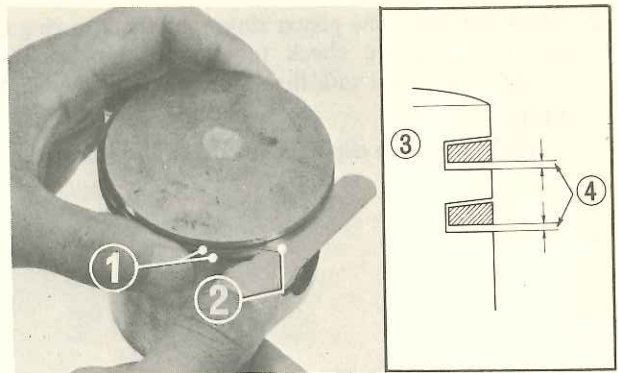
(1) Piston rings (2) Feeler gauge (3) Piston (4) Clearance
